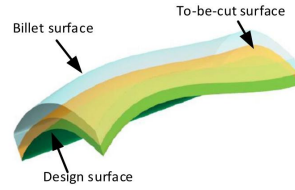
The relationship of billet surface, to-be-cut surface, and design surface
